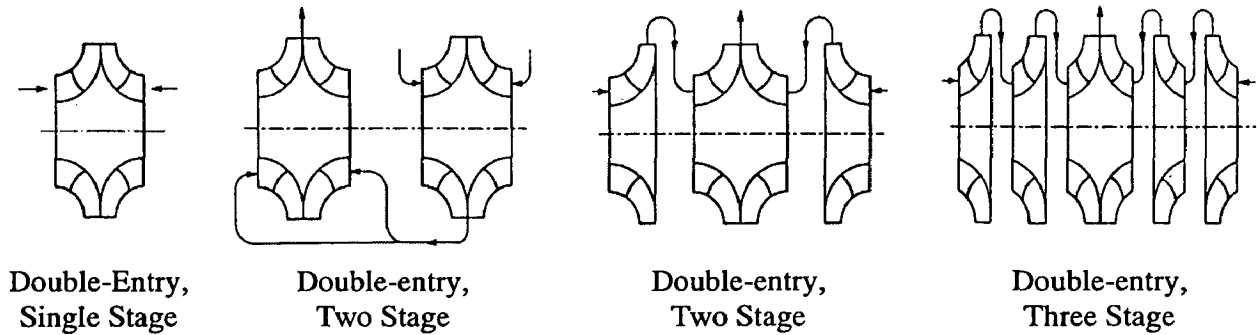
Single and Multi Stage Pump Impeller Arrangement
